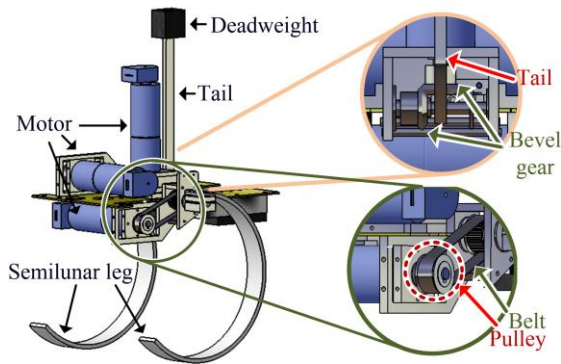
CAD drawing which shows transmission mechanism of the robot.
